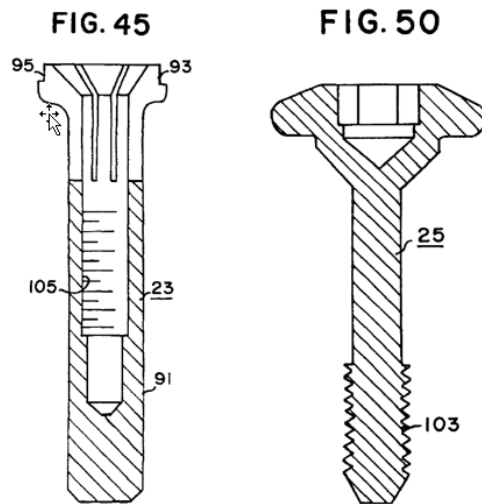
is a sectional view of buttress pin shank 23, and Figure 50 is a sectional view of pin head 25. *Id.* at 4:5–23, 8:63–67. In use, pin shank 23 is inserted into hole 57 or 63 of plate 13, until the flange of collar 93 is caught underneath plate 13, “to lock” pin shank 23 to plate 13. *Id.* at 8:29–53, 9:6–10. Then, screw portion 103 of pin head 25 is received by threaded aperture 105 of pin shank 23, and pin head 25 is threaded into pin shank 23 to cause collar 93 to expand to lock pin shank 23 to plate 13 “in a very solid connection.” *Id.* at 8:63–9:14.
